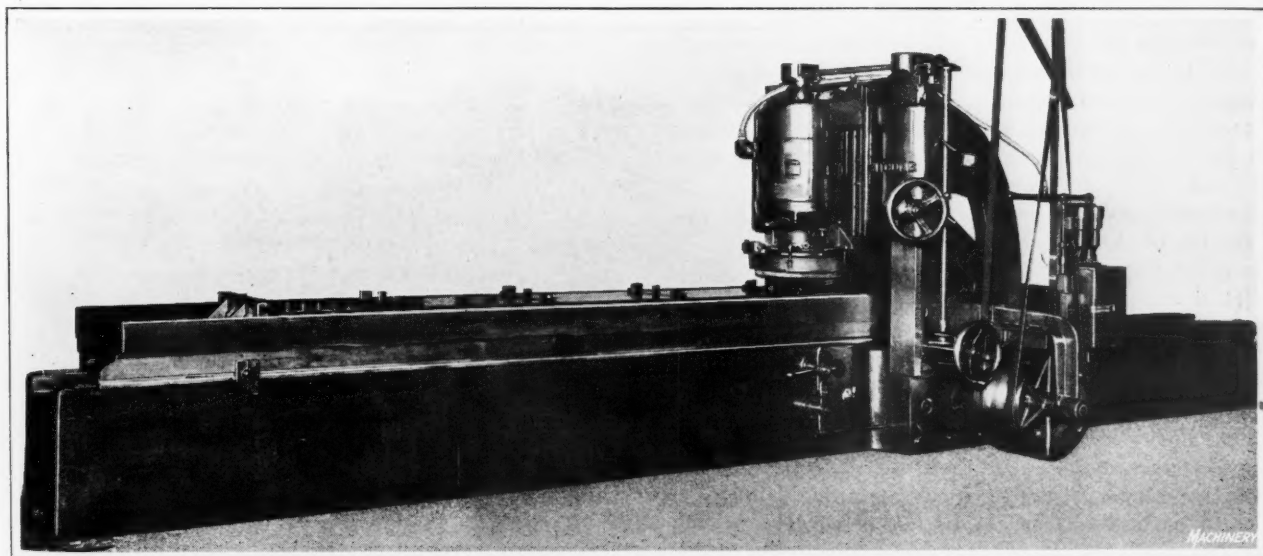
Reed-Prentice Surface Grinding Machine of the Planer Type for grinding Work up to 15 Feet in Length
